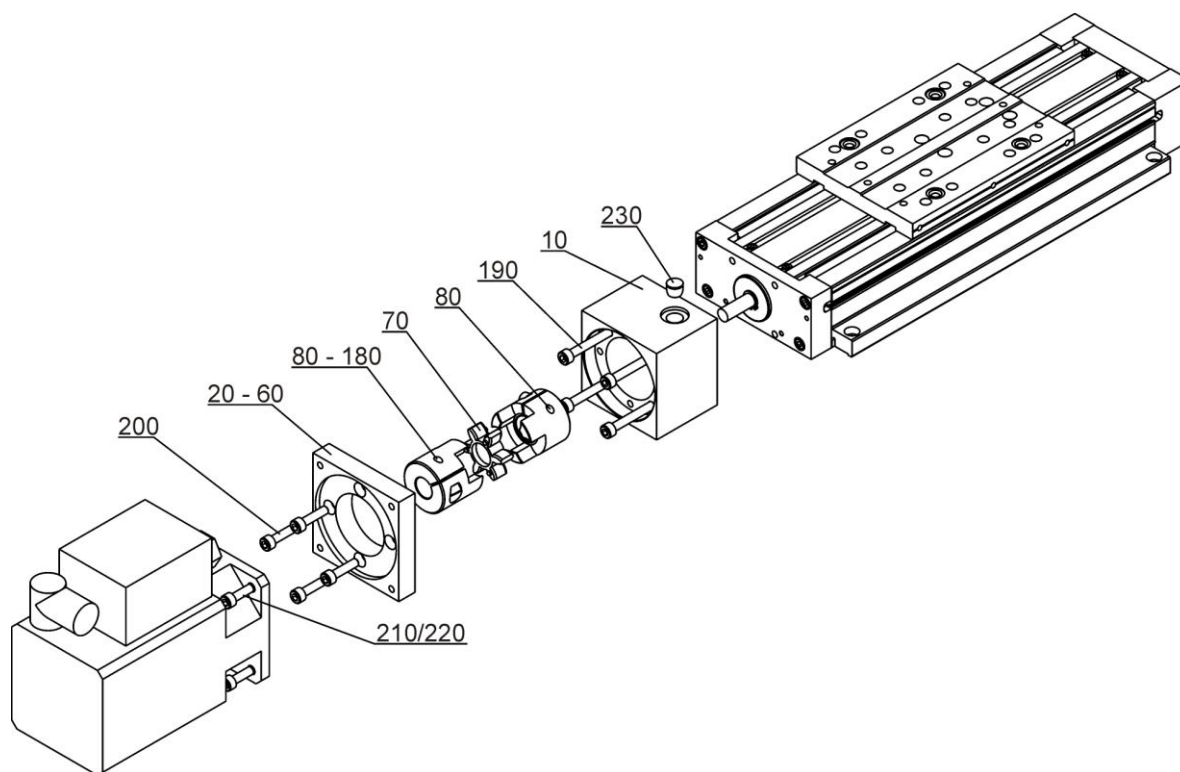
Axial motor flange profiLINE 115 exploded view (TG1000691)
